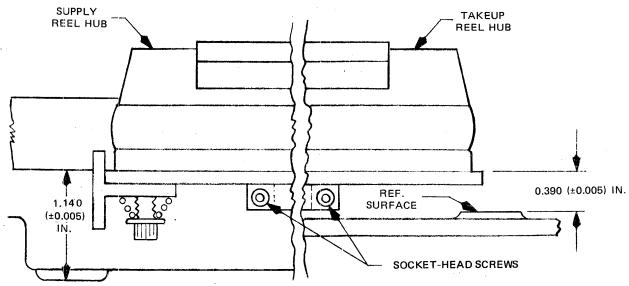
Reel Hub, Showing Adjustment Dimension
